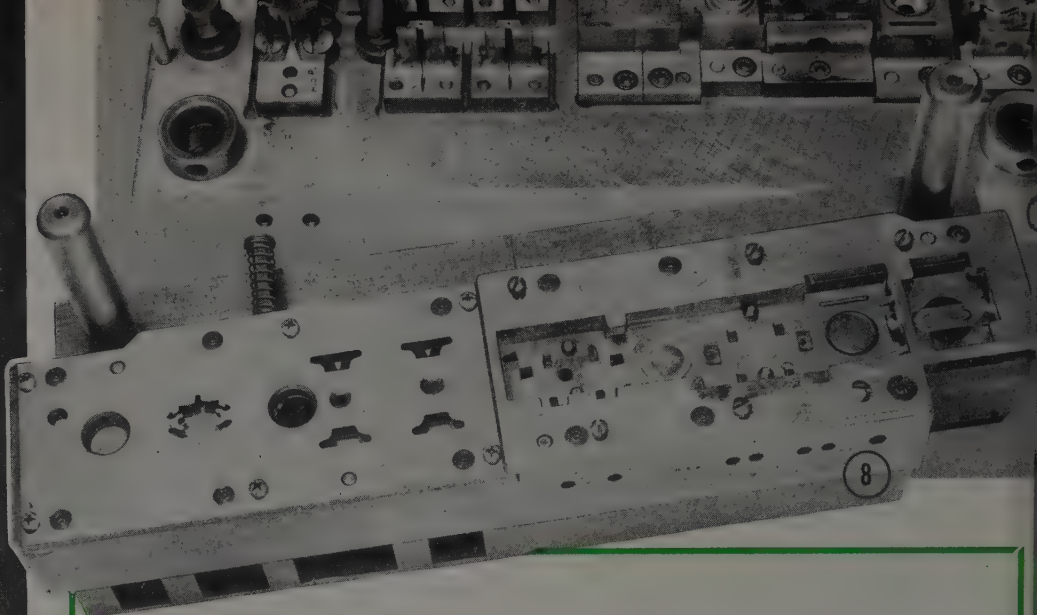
Test strip as removed from dies. Shearing and forming of finished unit is next step in process
